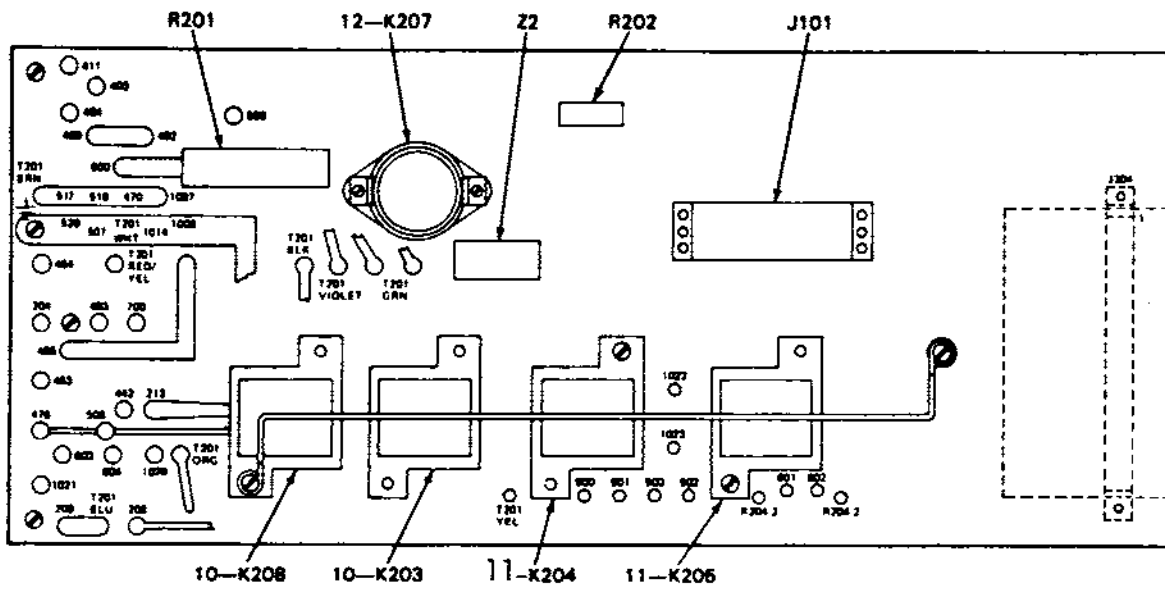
RC-5B Parts Location: P.C. Assembly 12370, to SN 7809417
